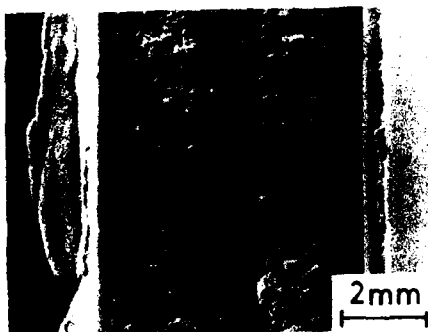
Outer ring raceway of No. 2 bearing after failure.
